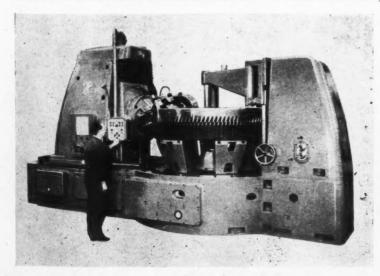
Pfauter type P. 2300 gear hobbing machine
